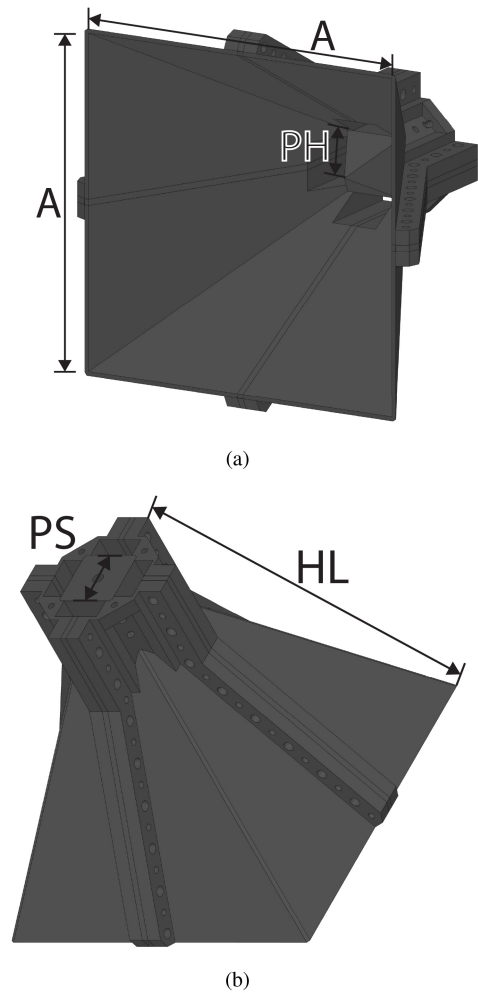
Full assembly of the horn showing: (a) inside the horn with the center spike dividing the four paths, (b) the flange end of the horn.
